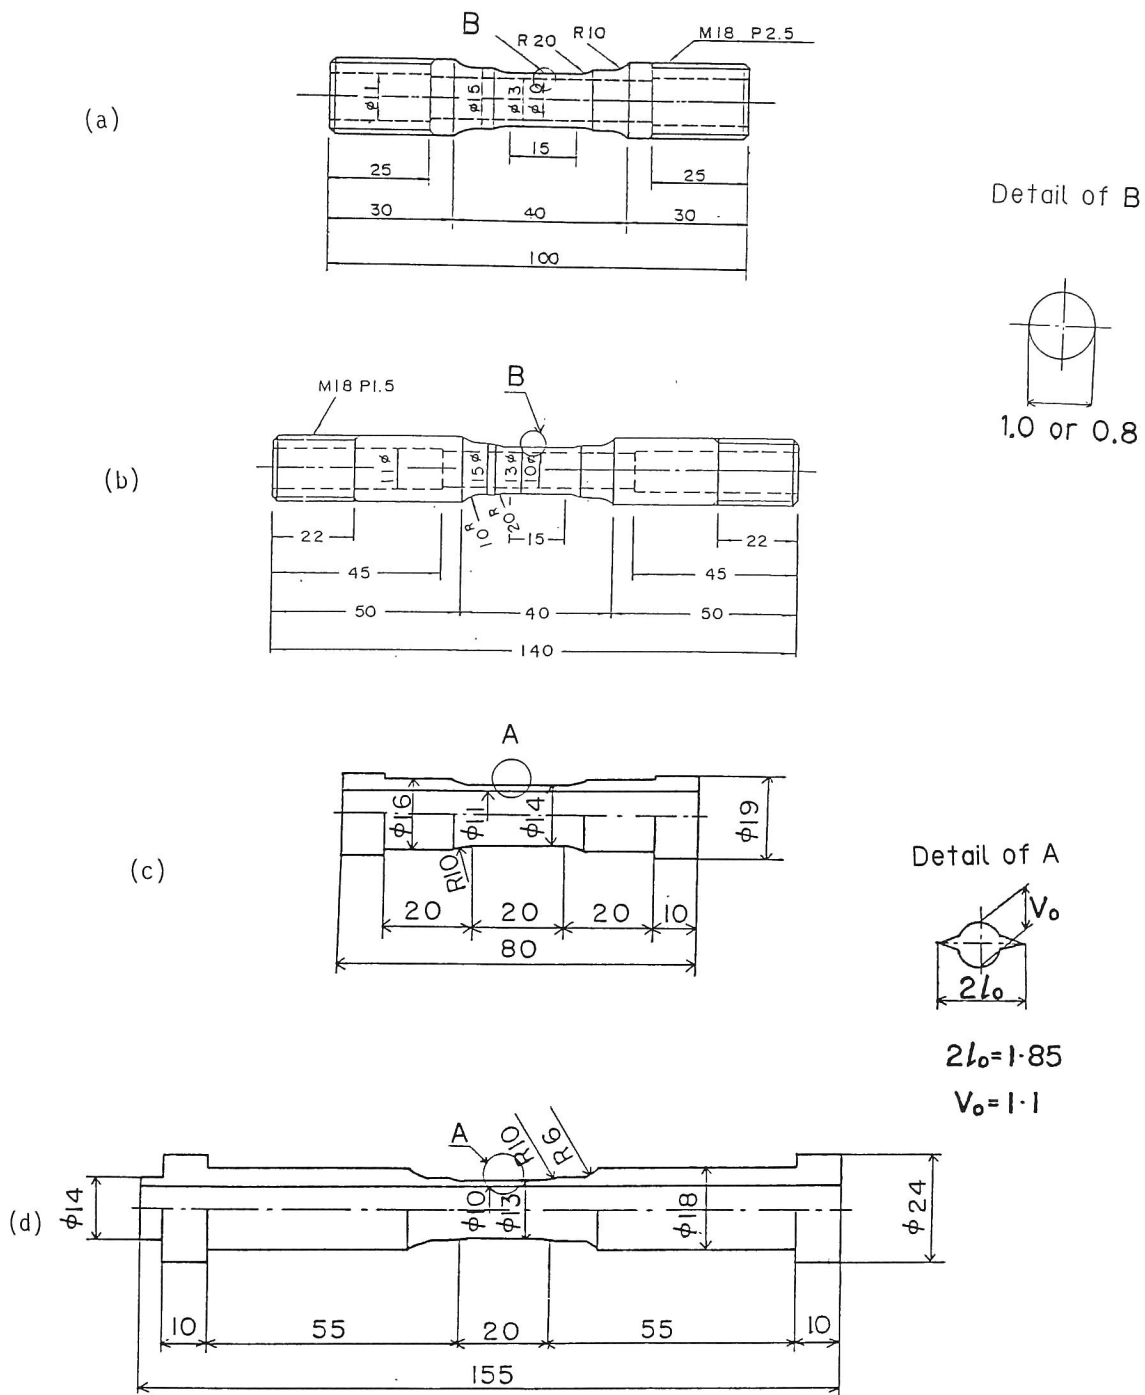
Shape and size of specimens. Dimensions are in mm.
